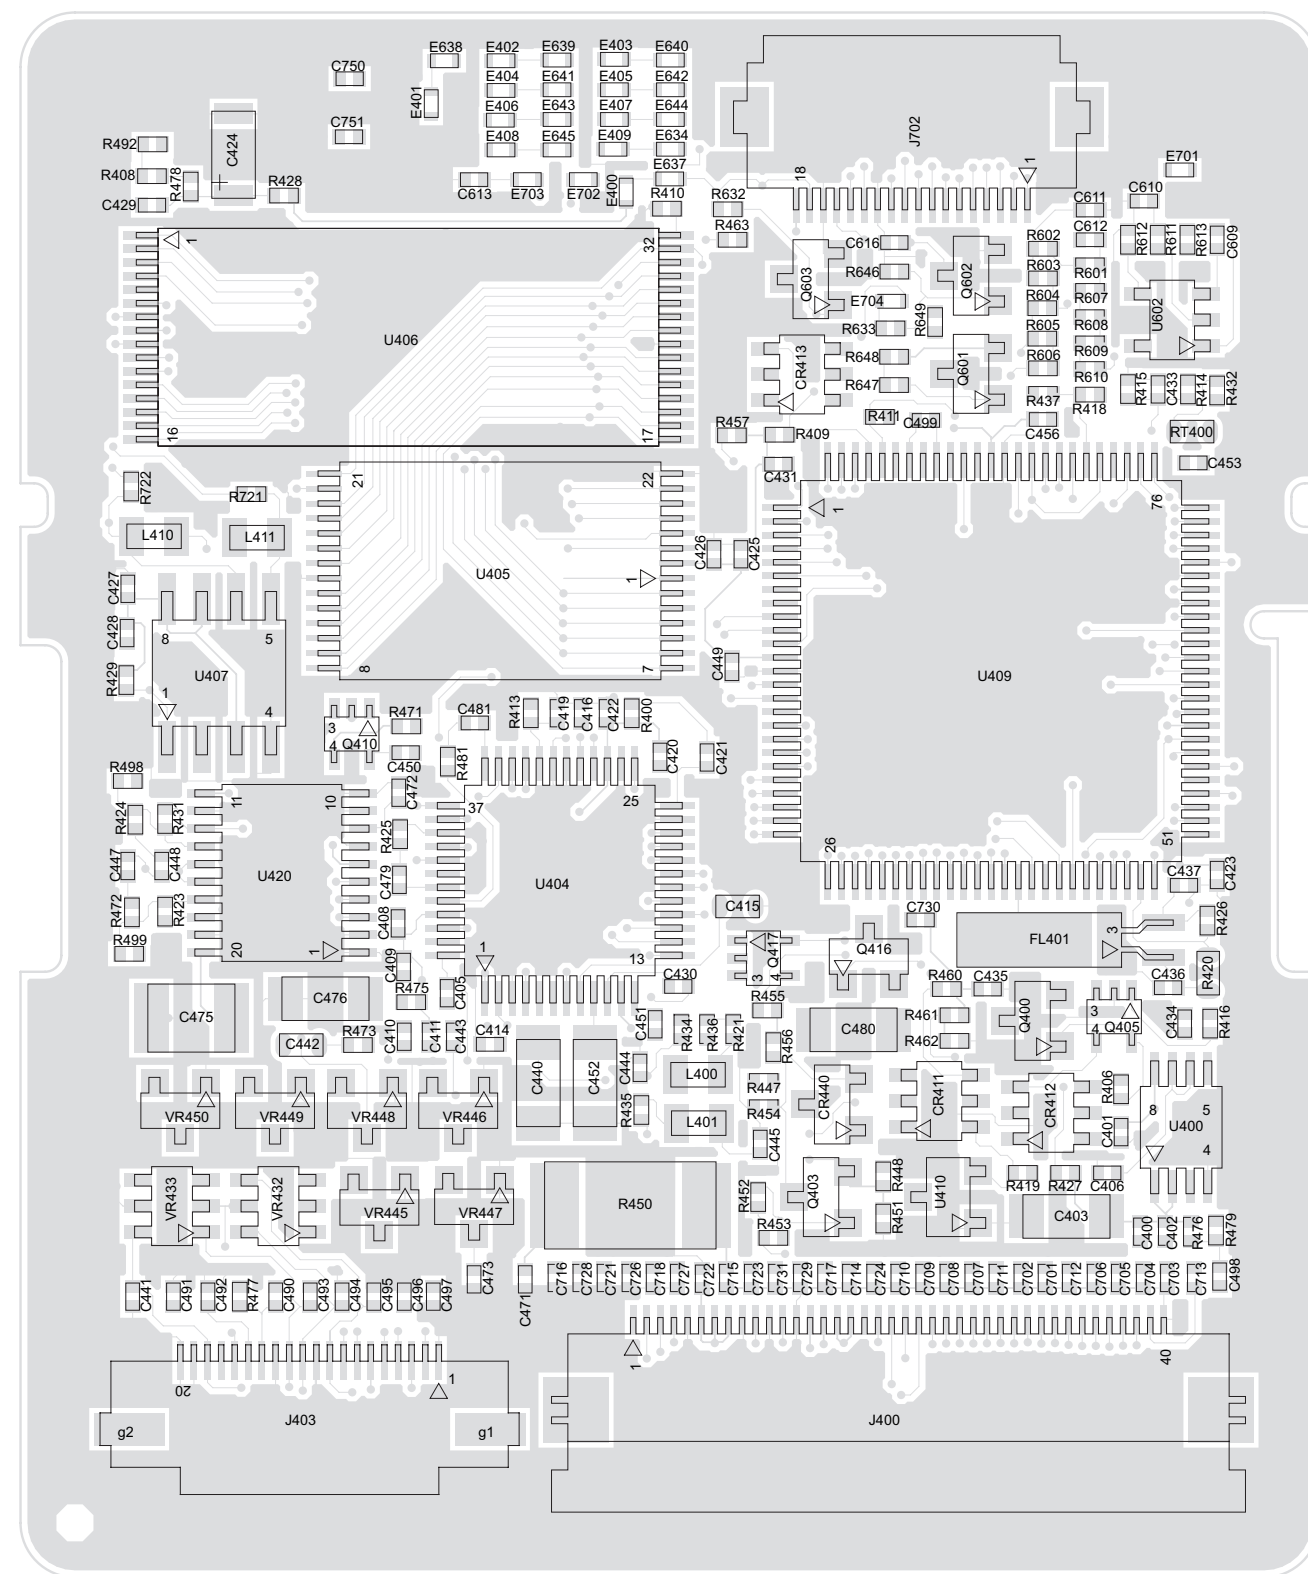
Controller Board Bottom View (PCB No. 8471678L01)
